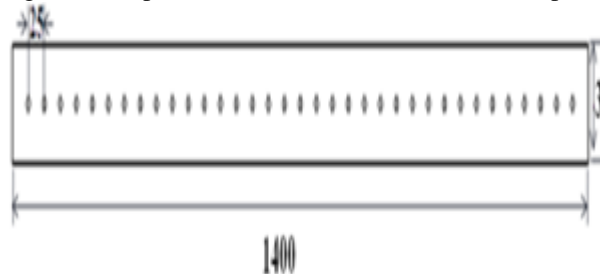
Geometric dimensions of tear strap (crack stopper)
